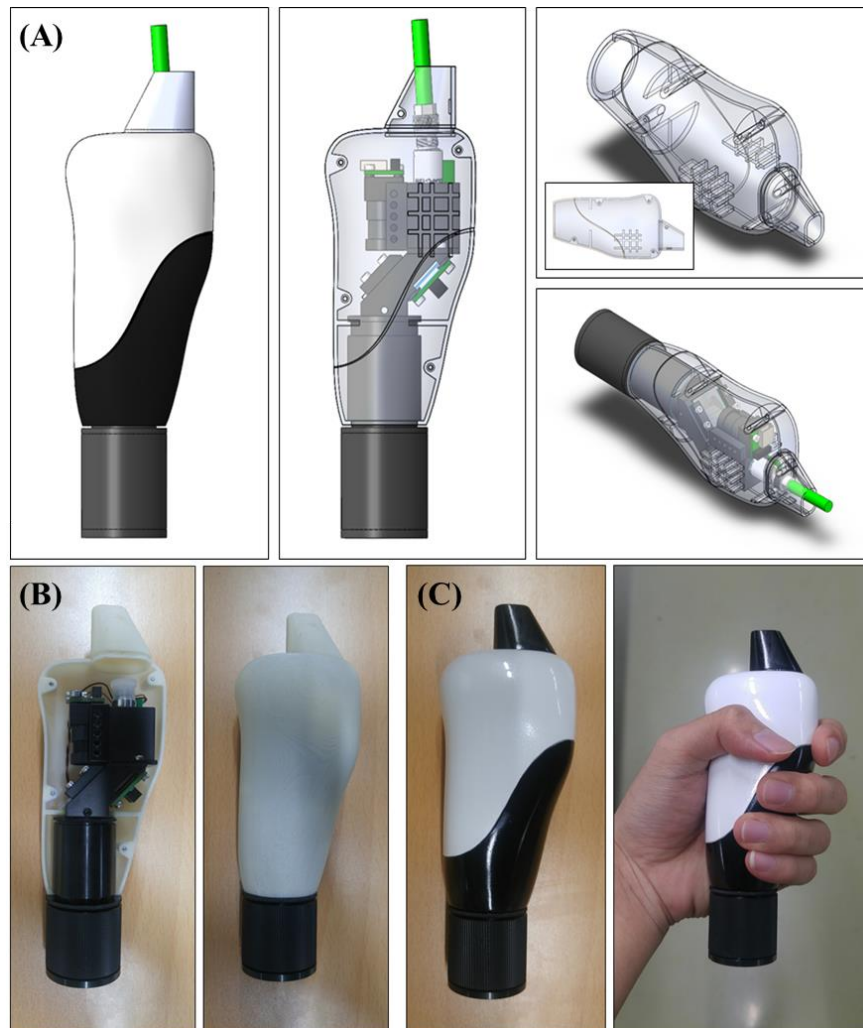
(A) 3D CAD design for manufacturing grip type hand-held probe. The grip type hand-held probe was designed enable to stable and comfortable image acquisition when the user was approaching a target using a probe, (B) Prototype hand-held probe with 3D printing, (C) Final assembled grip type hand-held probe.
